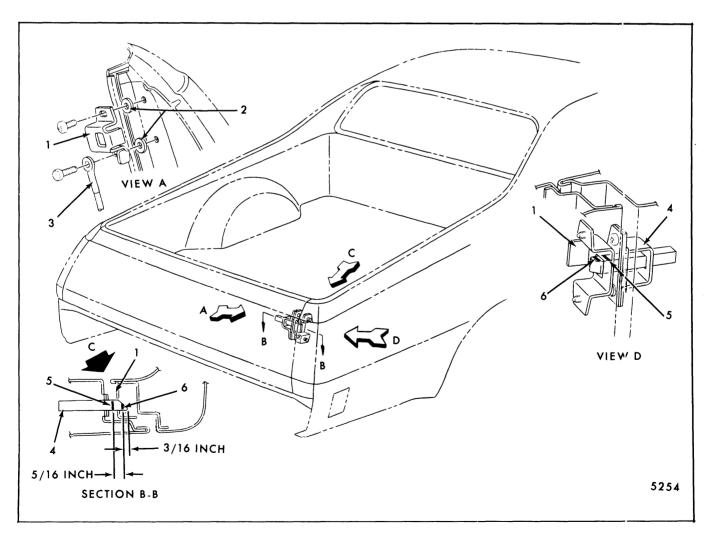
Tail Gate Latch to Striker Adjustment
